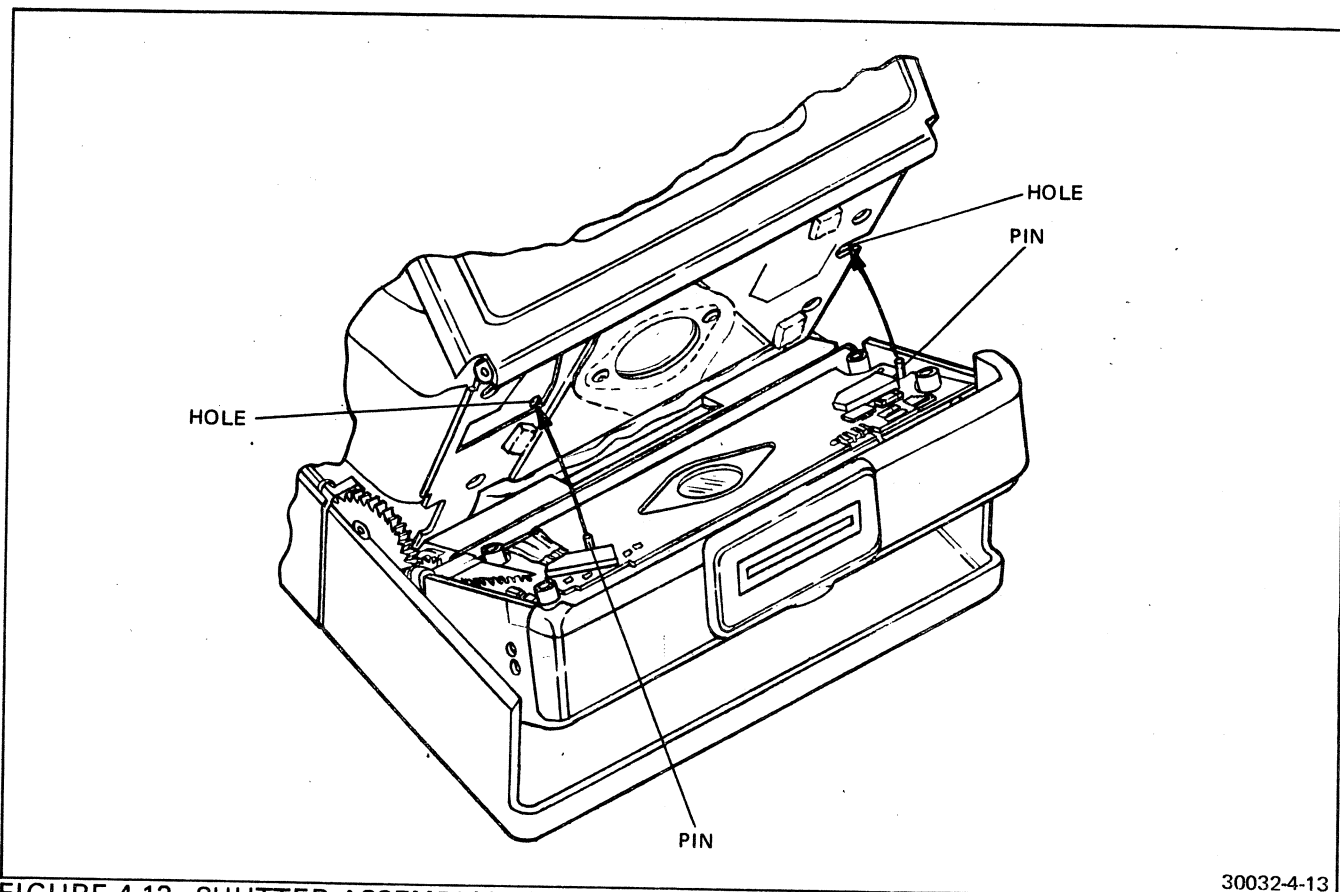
SHUTTER ASSEMBLY LOCATING PINS
